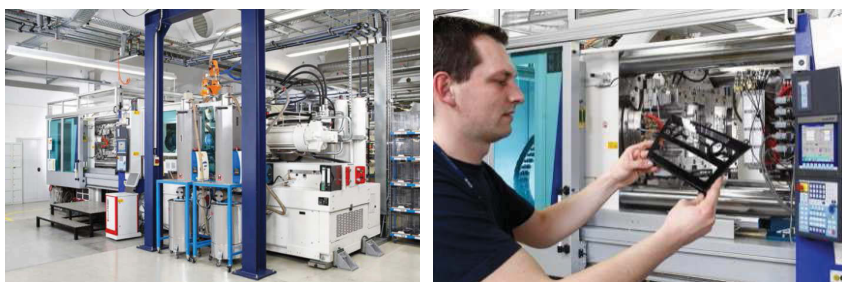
left: KraussMaffei KM500-2000/750CXZ injection moulding machine with peripheral equipment / right: produced plastic part “radio cover” in 2-component back injection moulding process.
